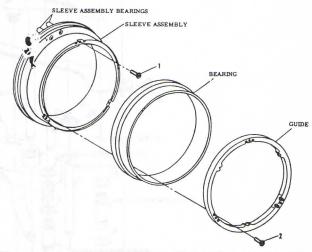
LENS BARREL SLEEVE REASSEMBLY
